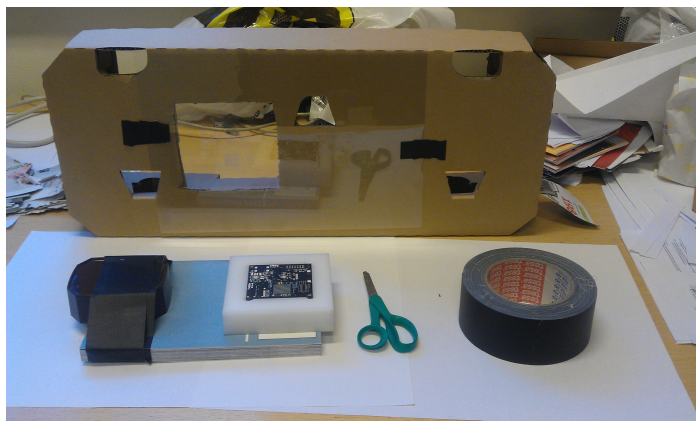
Attempt at creating a cardboard stencil printer frame
